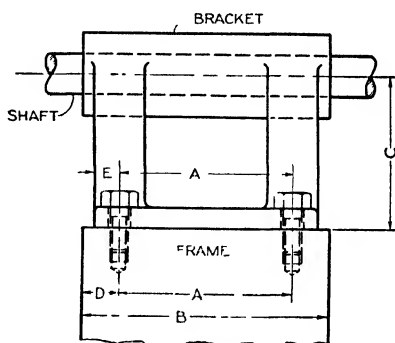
BRACKET ASSEMBLY — SINGLE BRACKET
